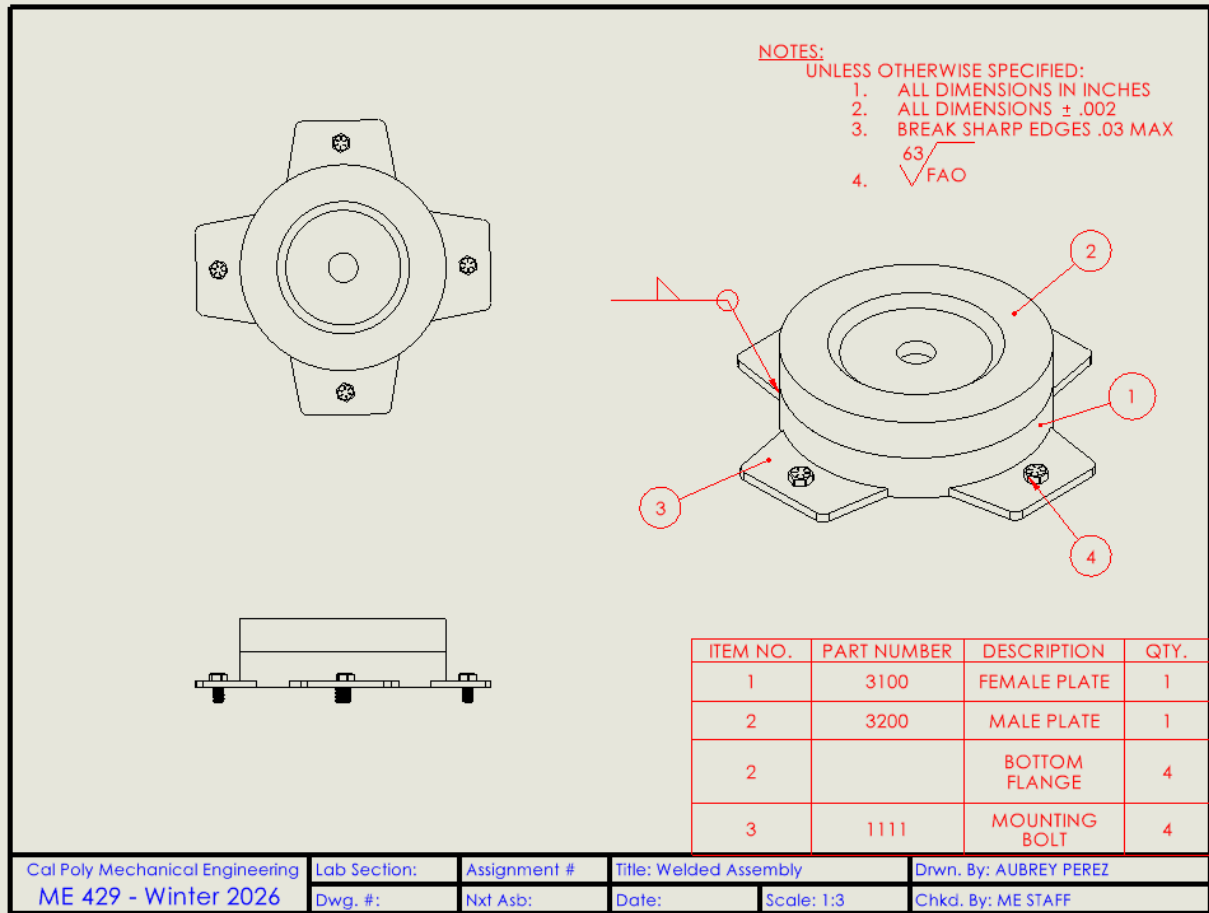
Detailed welded assembly drawing for assembly 3000
